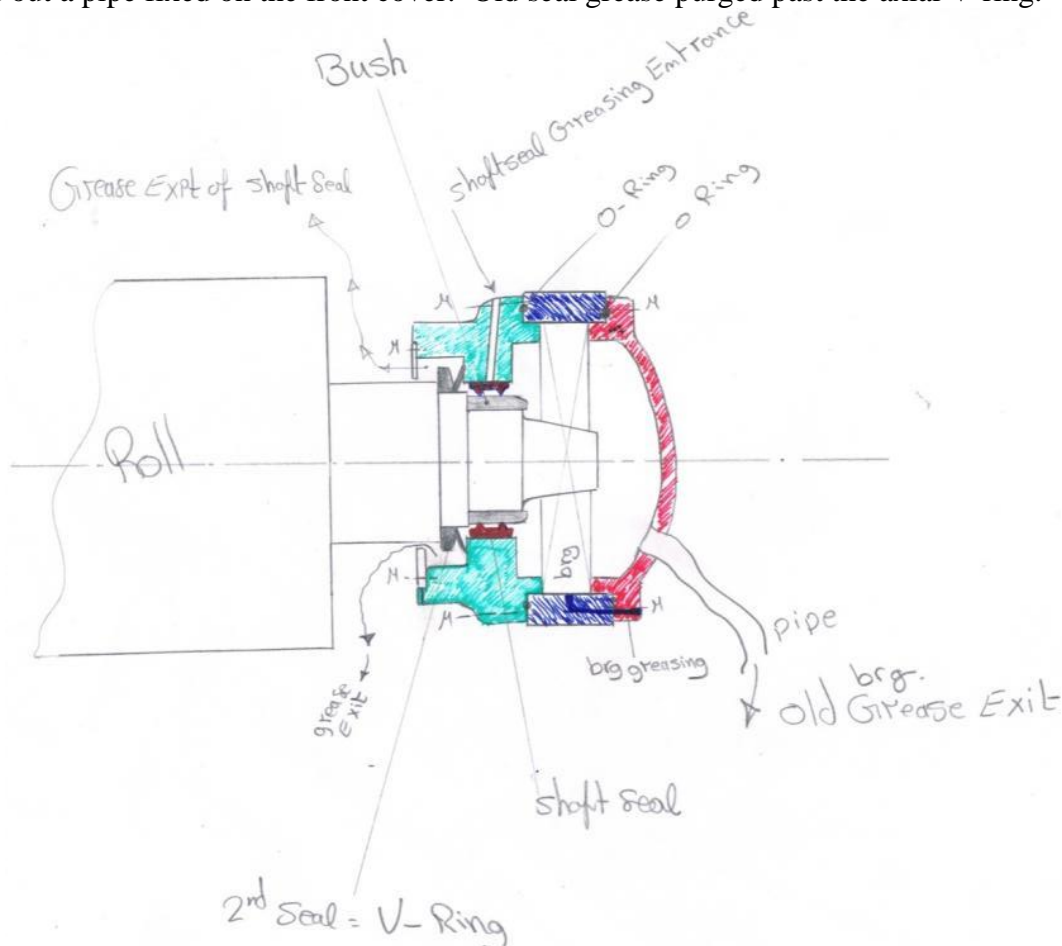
De-watering Press Roller Fixed End Bearing Arrangement
